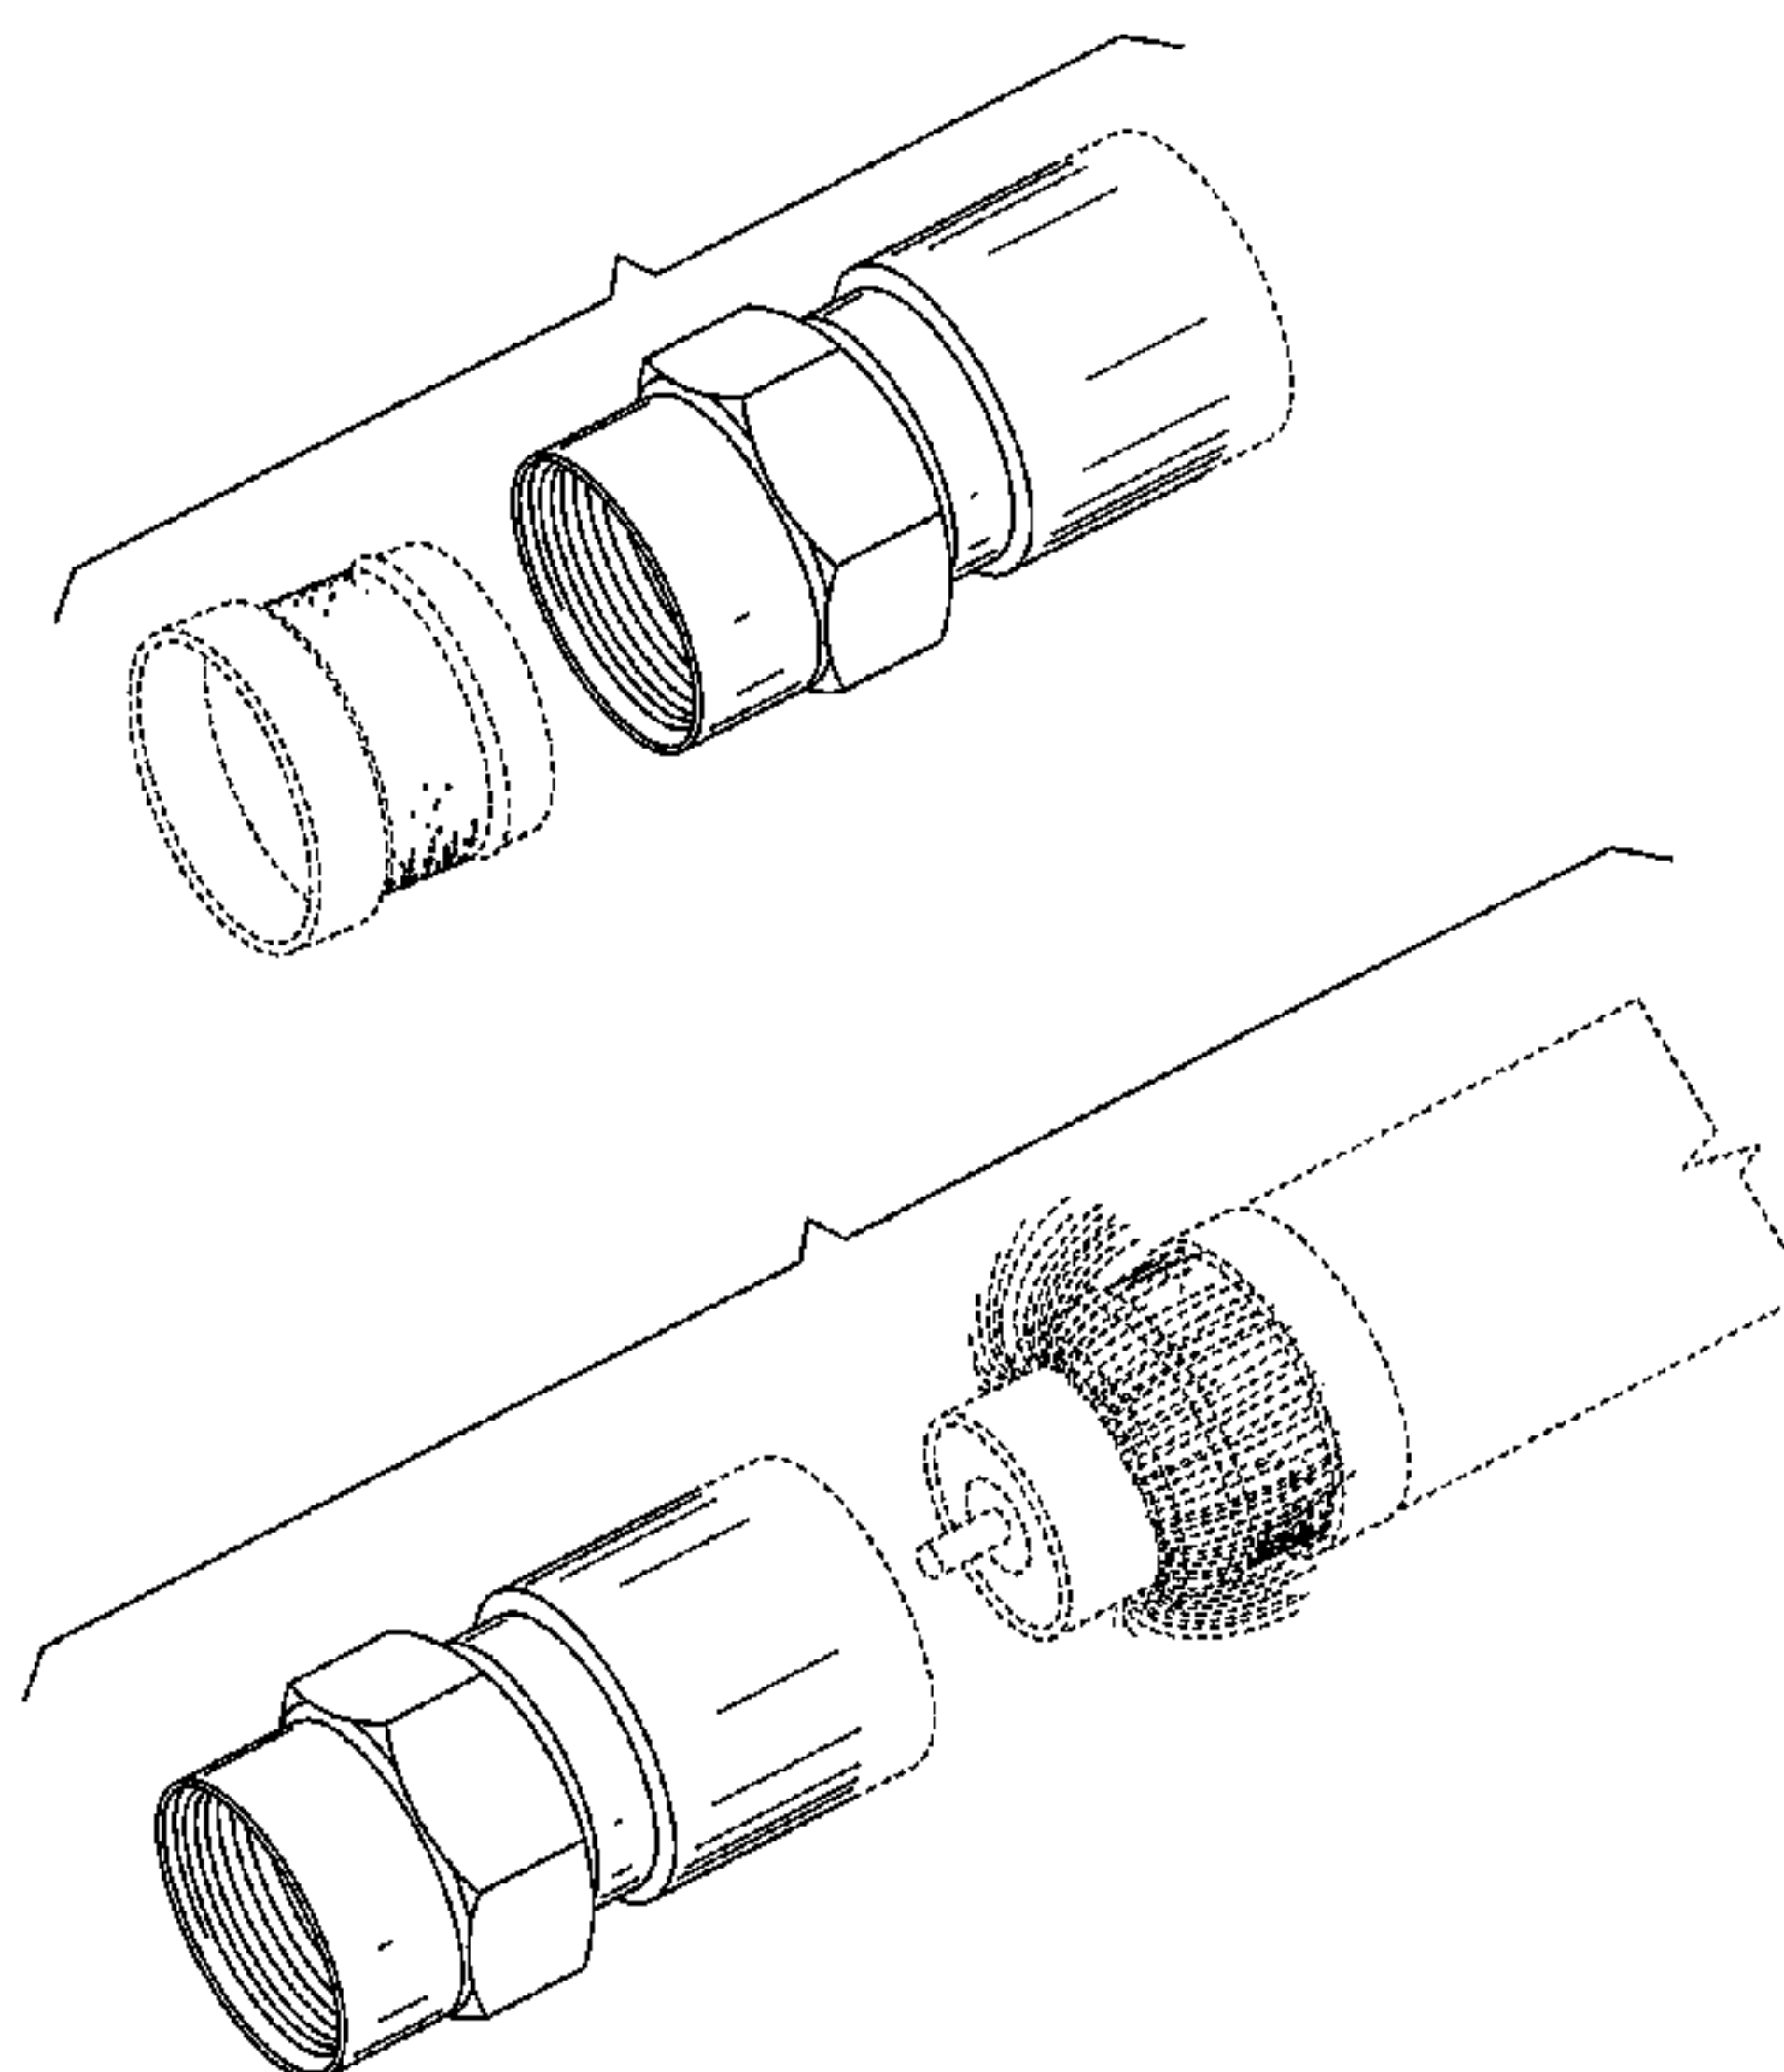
is an environmental view of a package of the F-style coaxial connector and pre-attached removable front end compression sleeves for use at installation; and,
